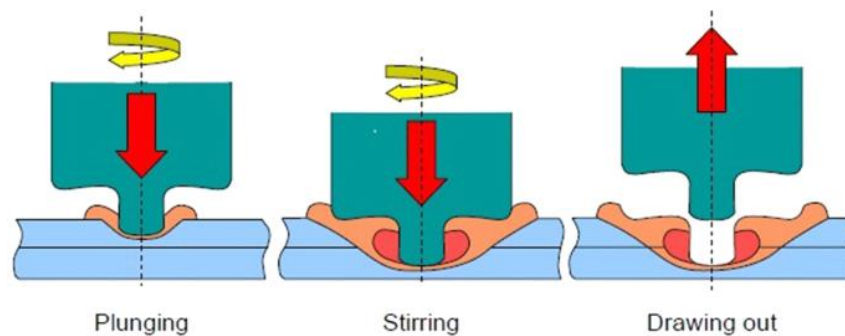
Principle of Friction Stir Spot Welding
